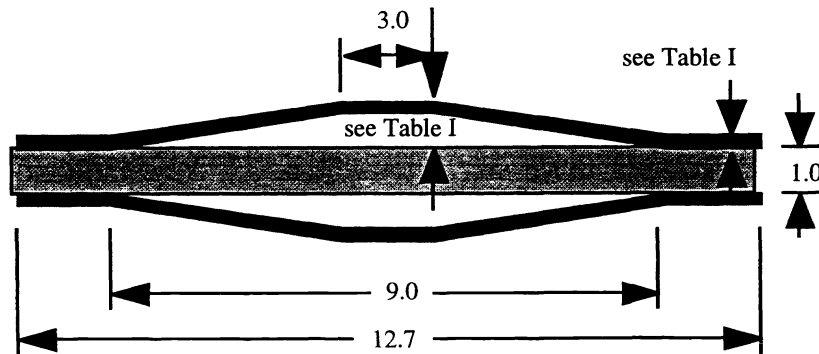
Single cymbal flextensional driver element (dimensions in mm).
